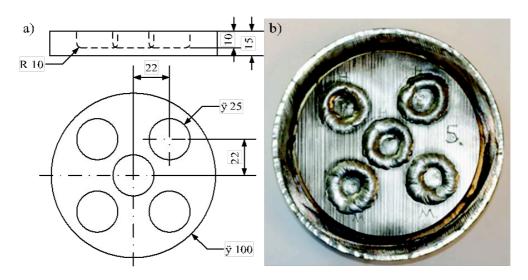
a Sample design. B Disc with filled grooved. Note the restraint maximising stainless steel disc welded onto the bottom of the Haynes 282 disc.
